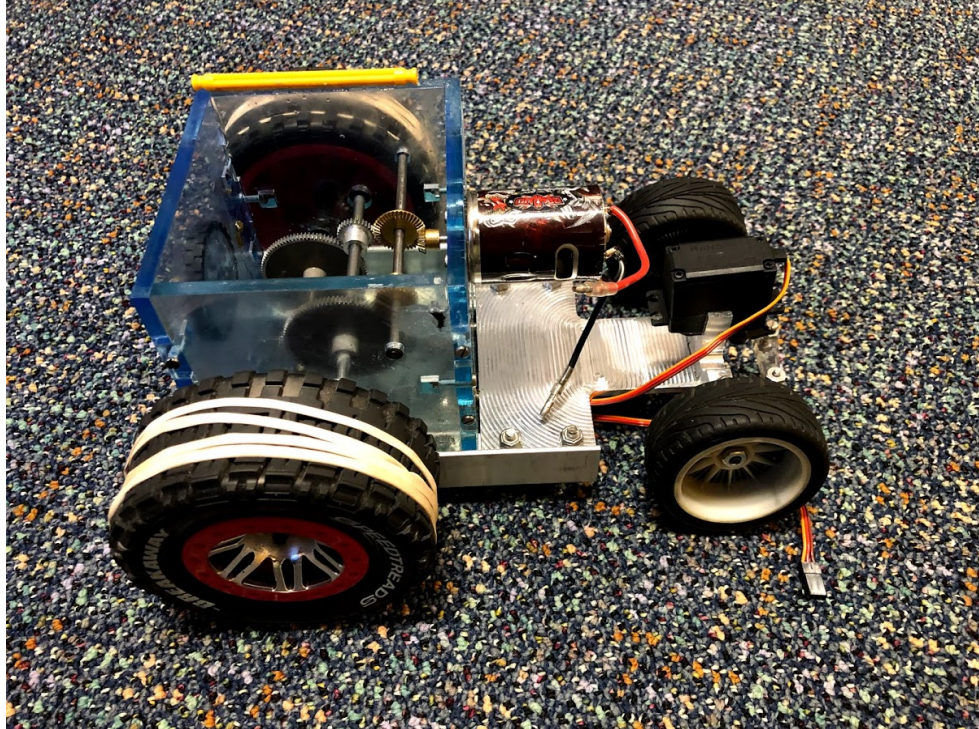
A car designed by Vinve Lucca, Joe Stapleton, Peter Nash, Colin Saunders, Zach Fischer, Jake Chiudina featuring a billet machined chassis and laser cut gearbox housing.
